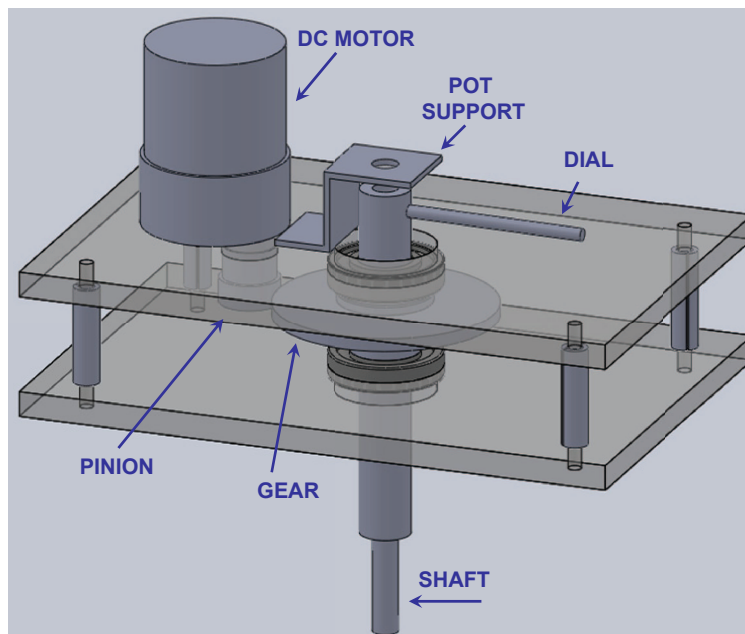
Axonometric view of the designed assembly. The DC motor actuates through a pinion-gear mating the shaft whose position is constantly monitored through a potentiometer fixed to the top plate.
